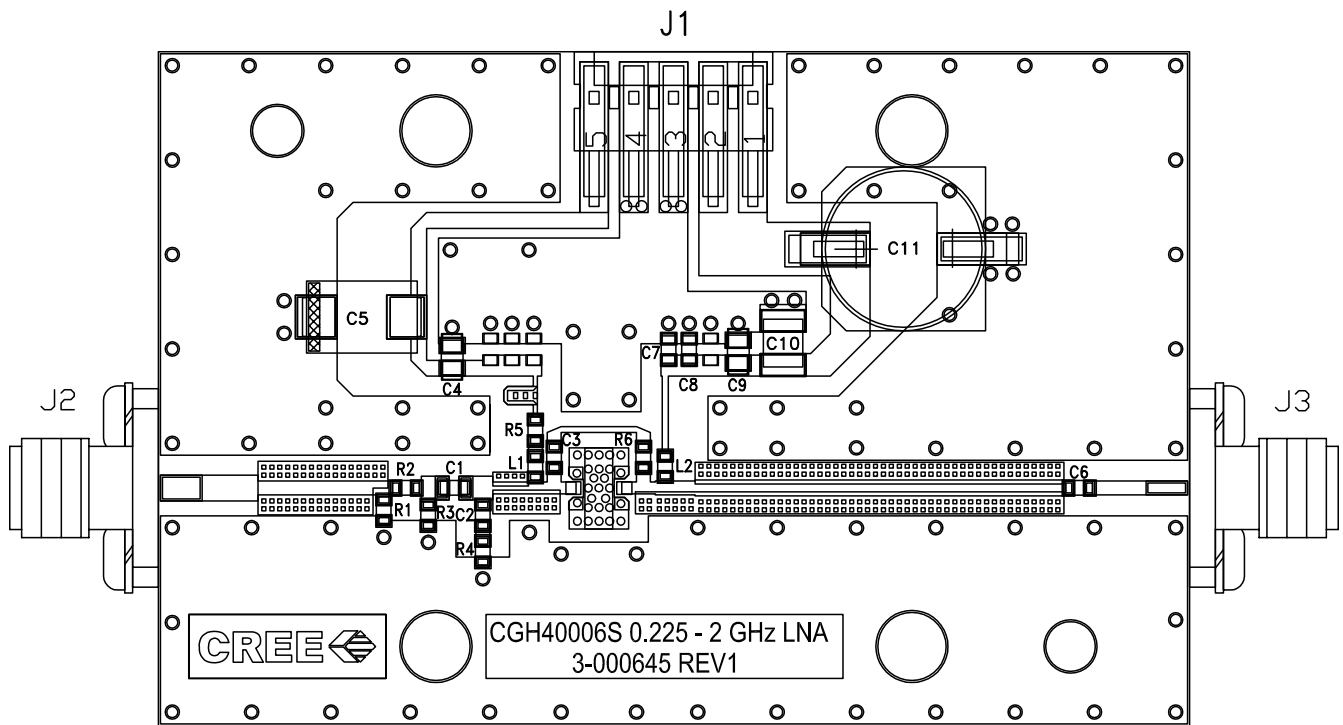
CGH40006S-LNA-KIT Demonstrator Printed Circuit Board Assembly
